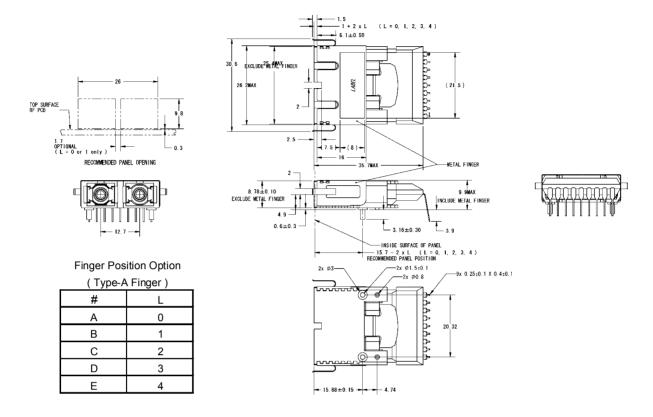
Outline Dimensions (SCM 7104-GC-#N)
